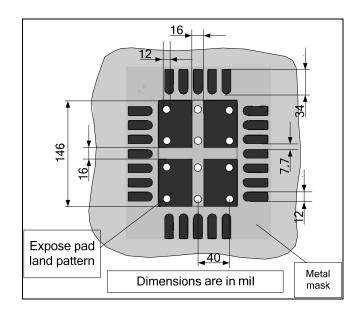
Recommended Solder Printing Paste Mask Apertures (CS)
